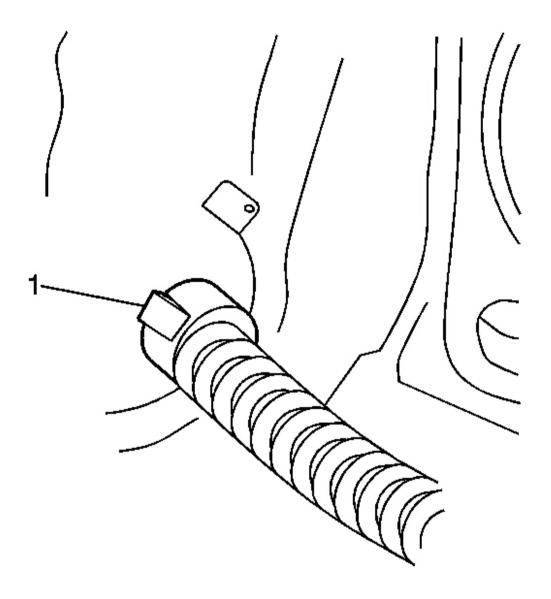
Identifying Park Brake Cable Fitting Retaining Tab Courtesy of GENERAL MOTORS CORP.
